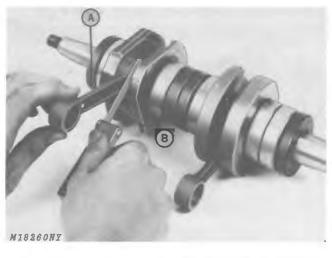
Inspecting Crankshaft and Connecting Rod
